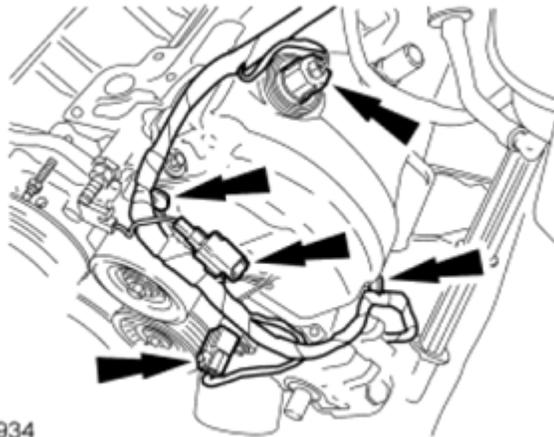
Locating Ignition Coil Electrical Connectors And Engine Wiring Harness Retainers (RH)
